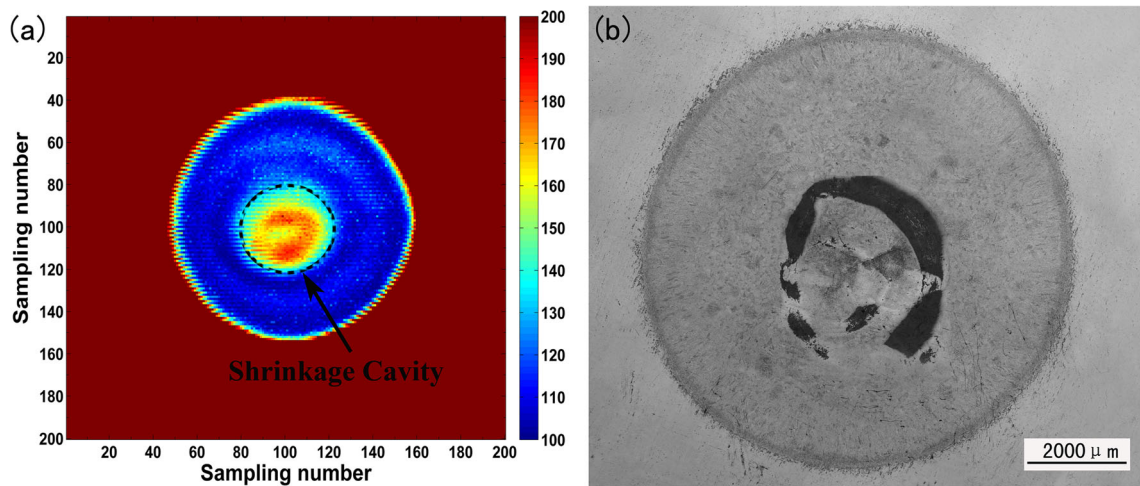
Diagrams of spot welded specimen. a C-scan diagram. b The joint cross-section metallograph
